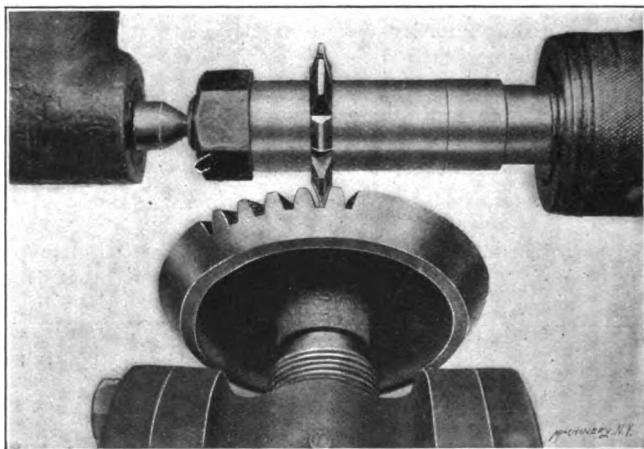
Cutter Completing the Tooth, Showing Widened Tooth Space.
